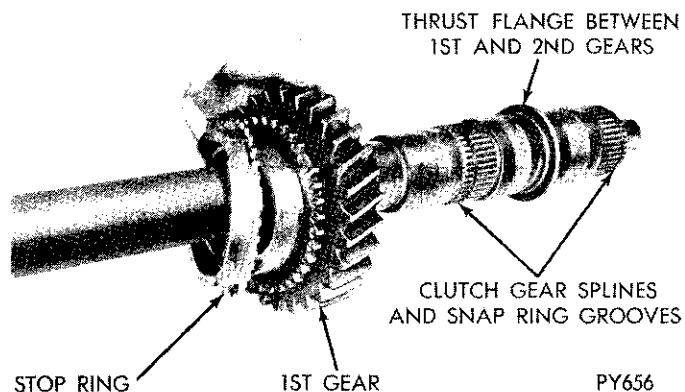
1st Gear and Stop Ring—Removal or Installation
